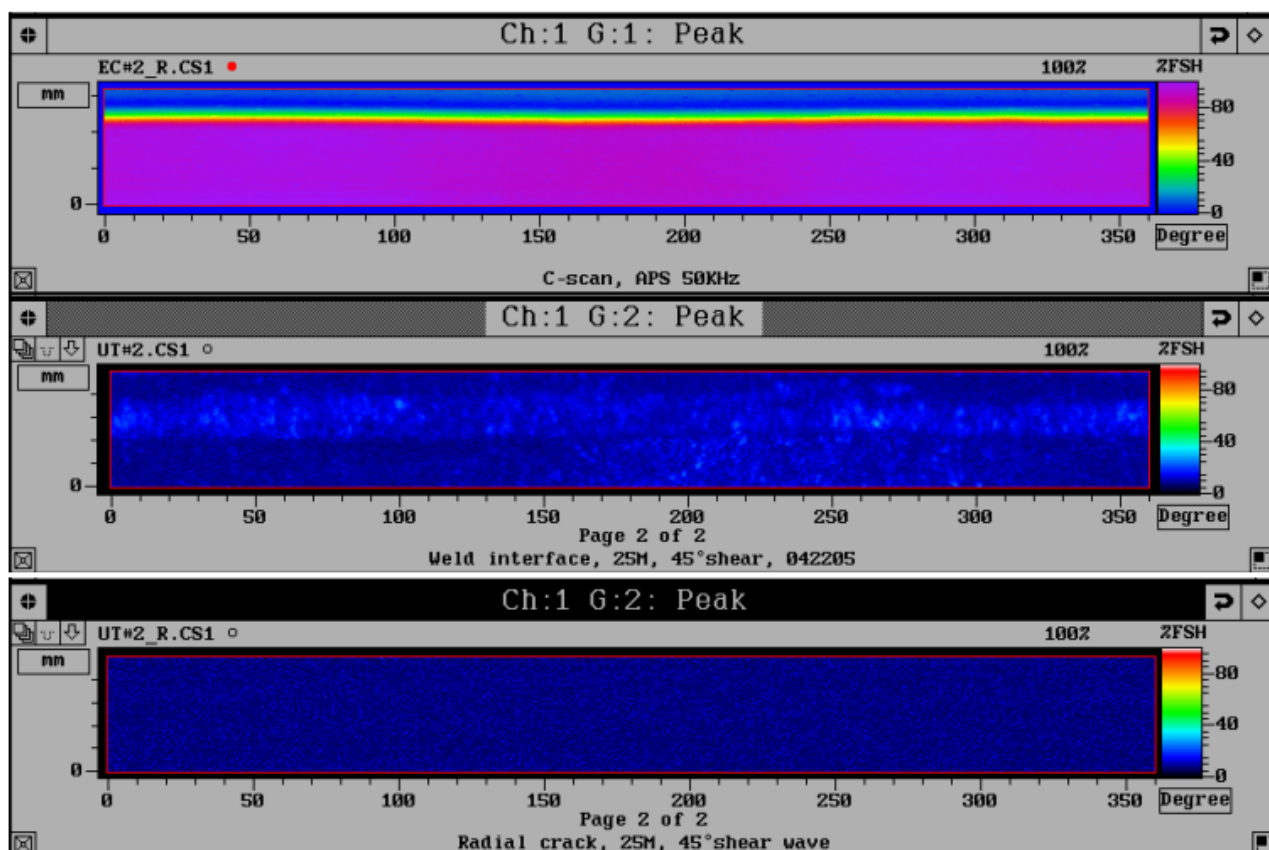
NDE results at the weld and heat affected zone. No surface or near surface cracks could be detected using (a) Eddy current technique, (b) ultrasonic inspections also indicate that the welding interface is uniform, and (c) free of radial cracks.
